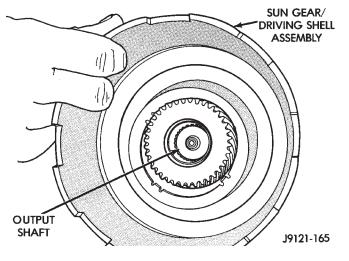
Installing Assembled Sun Gear And Driving Shell On Output Shaft
